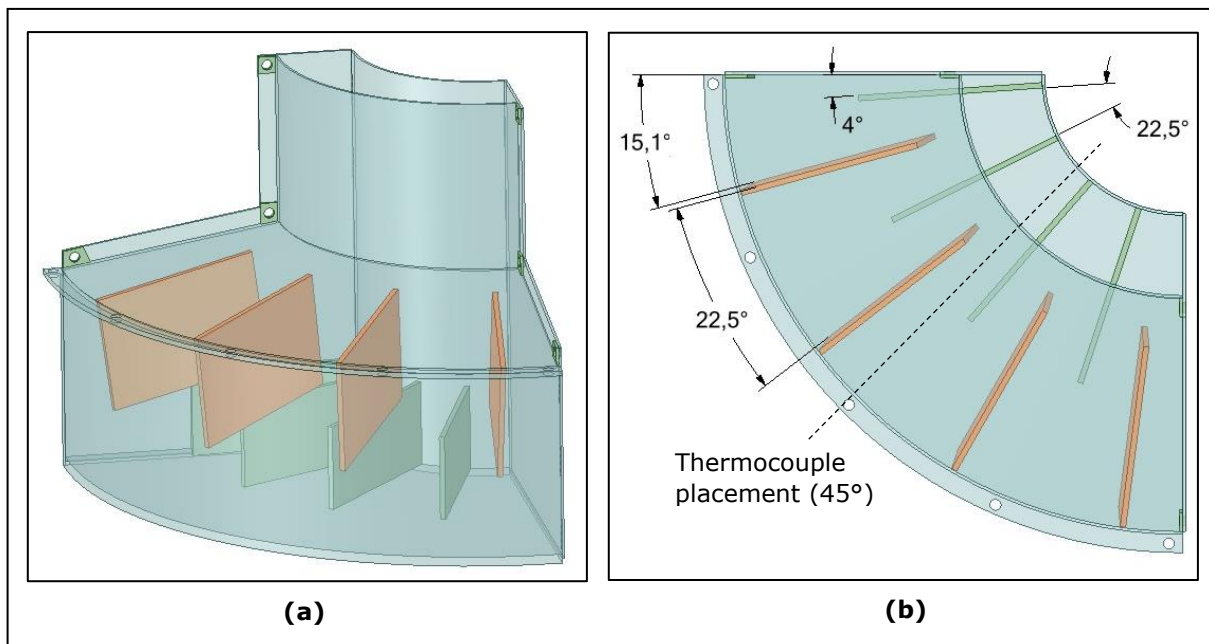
Proposed fin design; (a) 3D model of container with internal fins; (b) top view of container showing fin configuration
